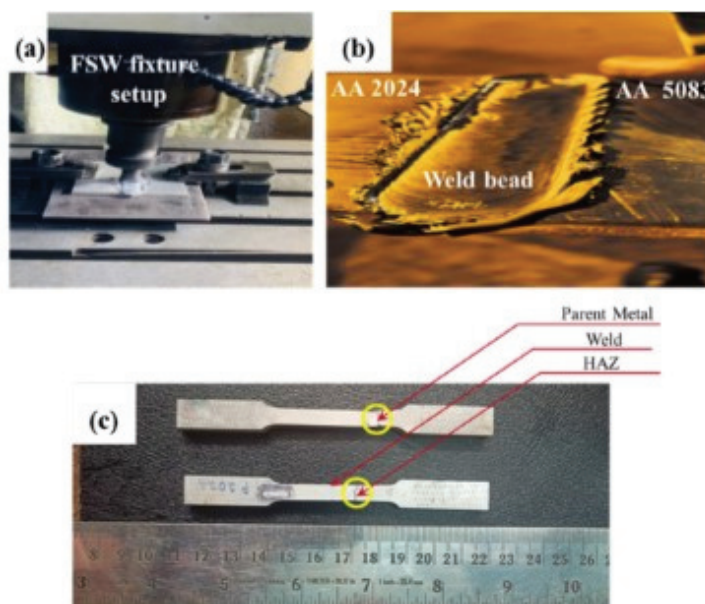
a) Friction stir joining processes; b) FSW plate; c) fractured specimens.
